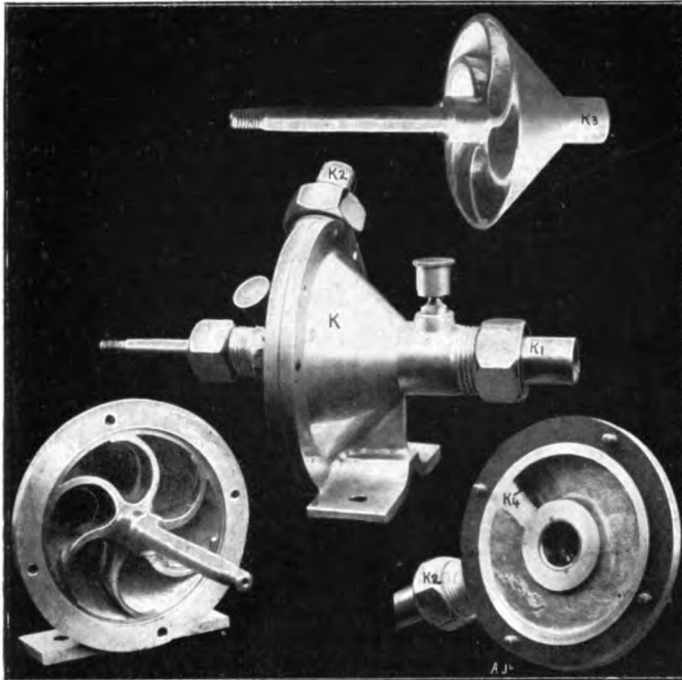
The Brotherhood Circulating-pump, shown complete and in parts.
